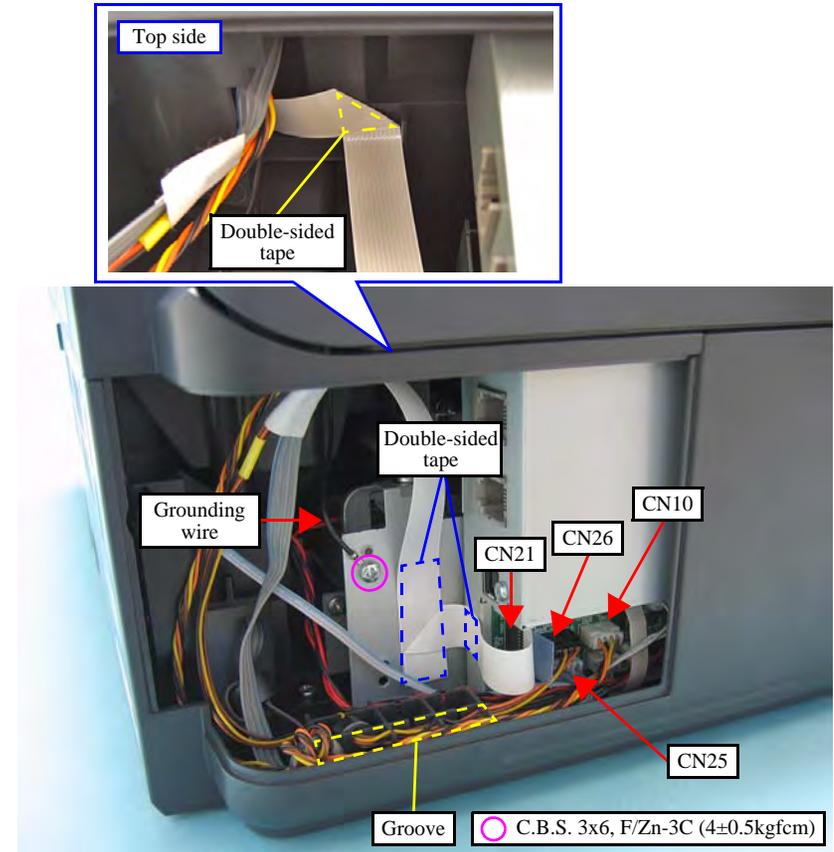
Removing the Scanner Unit/ADF Unit (1)
